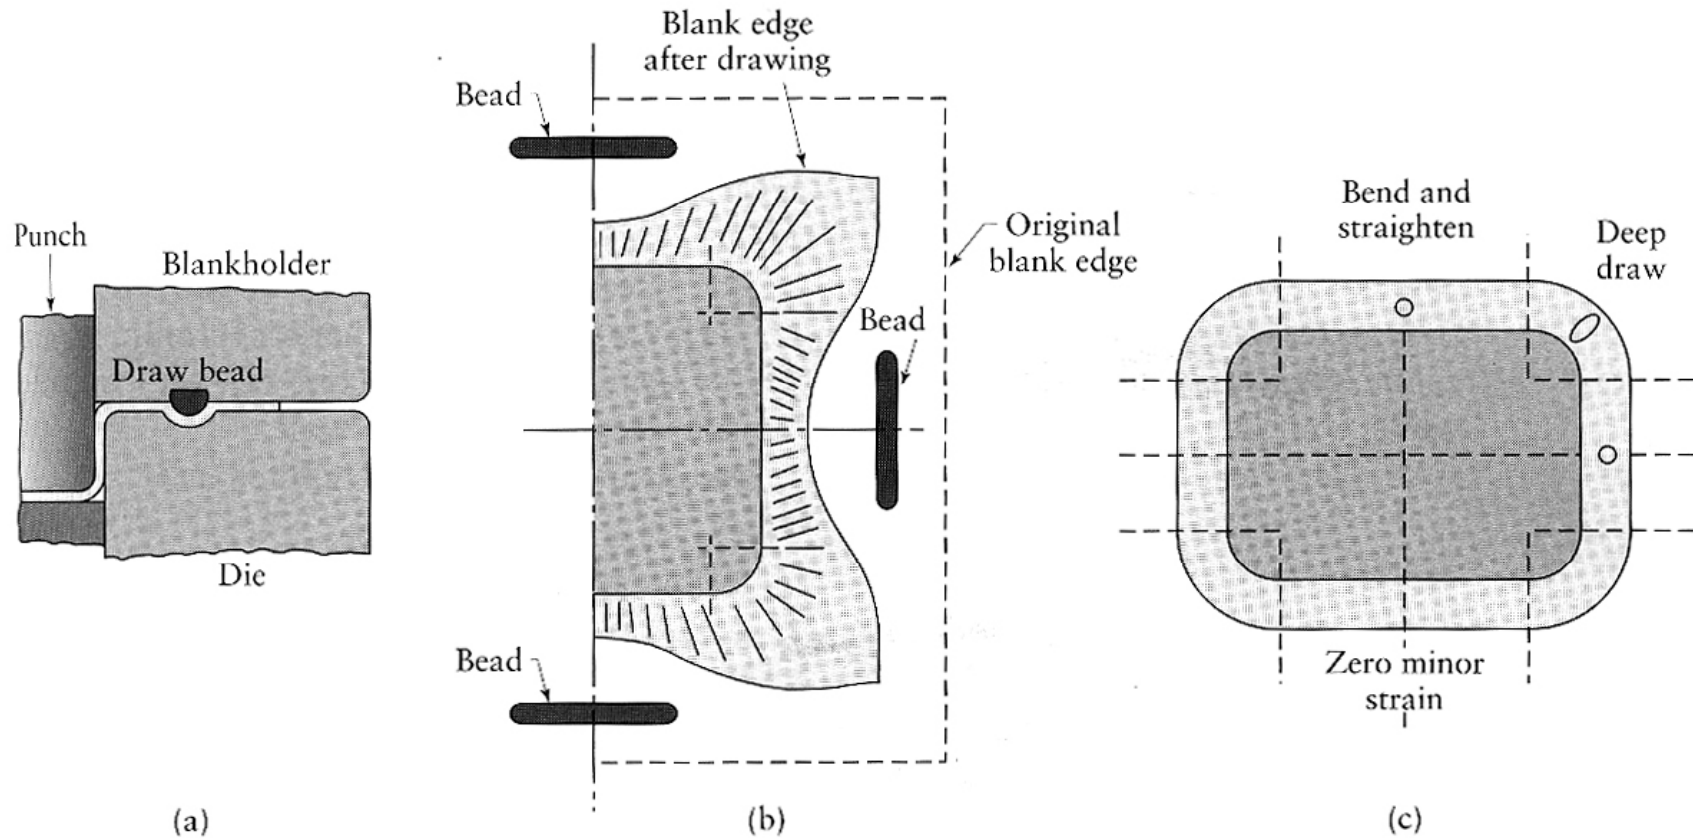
(a) Schematic illustration of a draw bead. (b) Metal flow during drawing of a box-shaped part, using beads to control the movement of the material. (c) Deformation of circular grids in drawing. (See Section 7.13.) *Source:* After S. Keeler.
